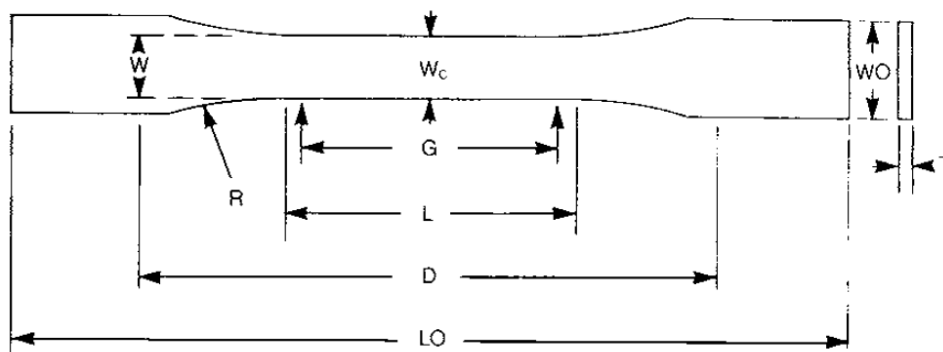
The shape of a tensile bar specimen for Type I molded rigid and semirigid plastics as required by ASTM D638-10. See Table 2 for dimension values [20].
